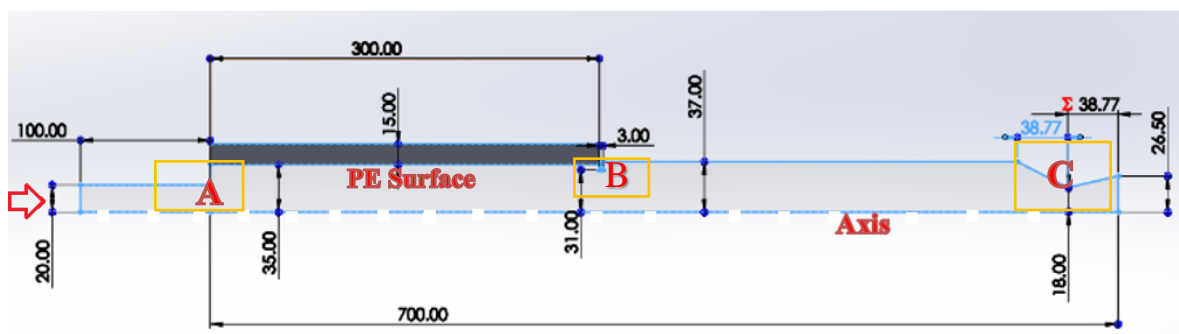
Geometry and dimensions of combustion chamber of solid fuel ramjet engine
